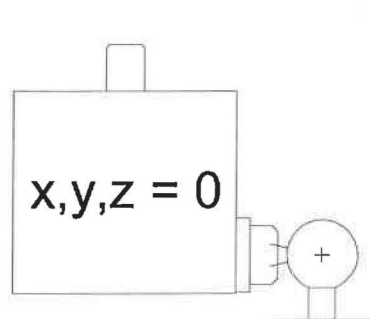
Finding zero on the CMM master ball with the sensor rotated
